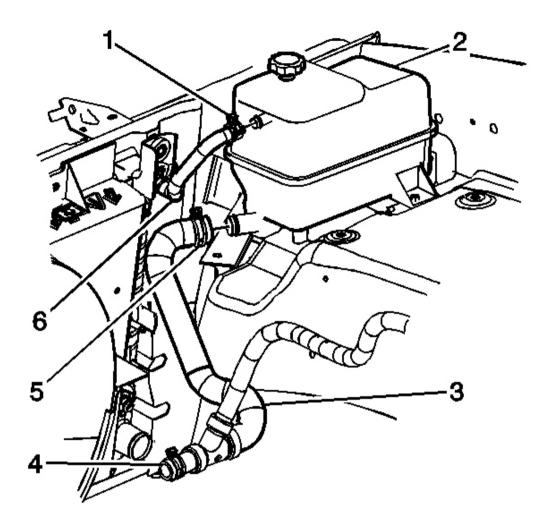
Surge Tank Outlet Hose & Surge Tank Courtesy of GENERAL MOTORS CORP.
